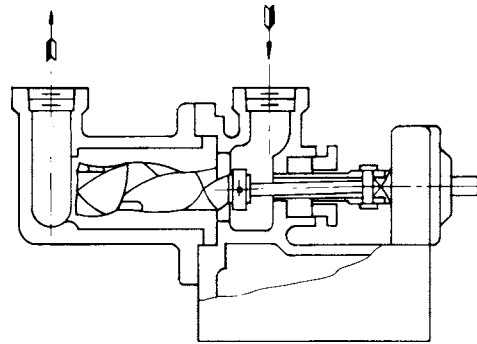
Progressing-cavity (single-screw) rotary pump. (Hydraulic Institute.)
